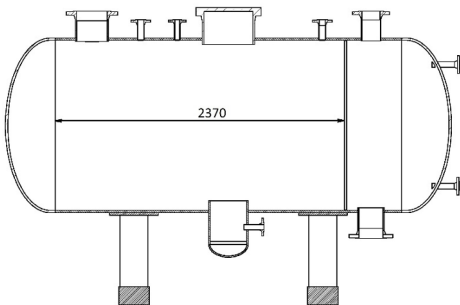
Schematic representation of the location of the stiffening ring, representing a corner with dimensions $20 \times 20 \times 3$ mm, on the inside cylindrical shell of the tank.
